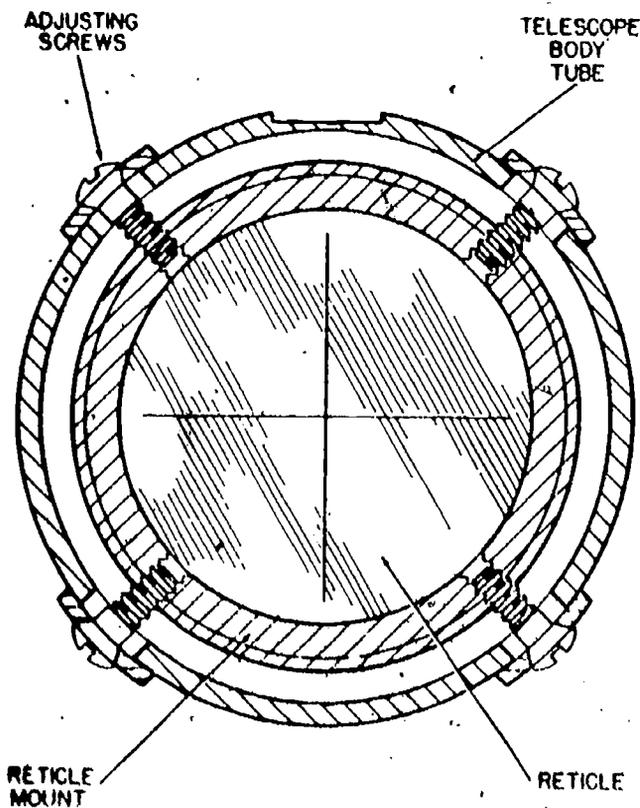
Cutaway view of a Mk 75 Mod 1, boresight telescope.
